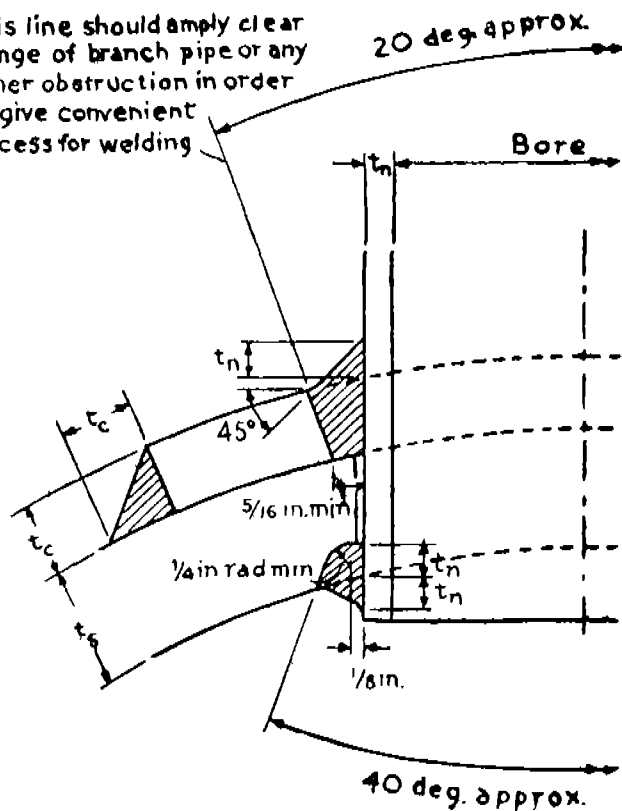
C Welded-in standpipe or branch with compensating ring for standpipes or branches up to and including 4 in. bore.
